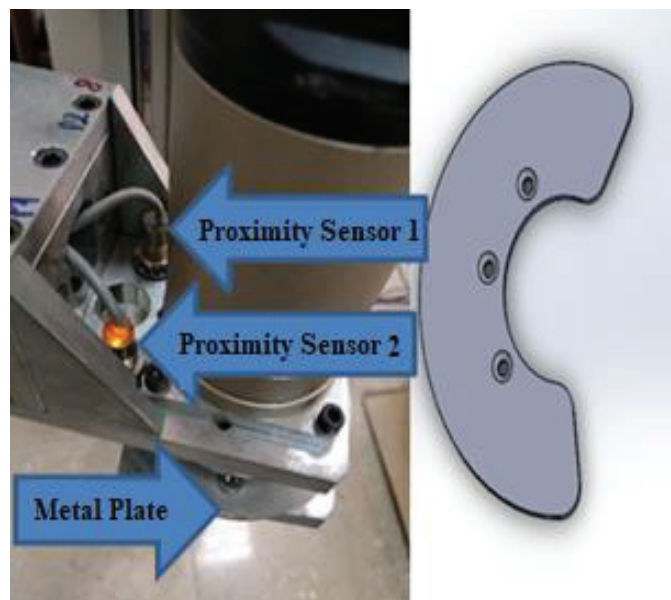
Proximity sensor, the metal plate and its 3D drawing
